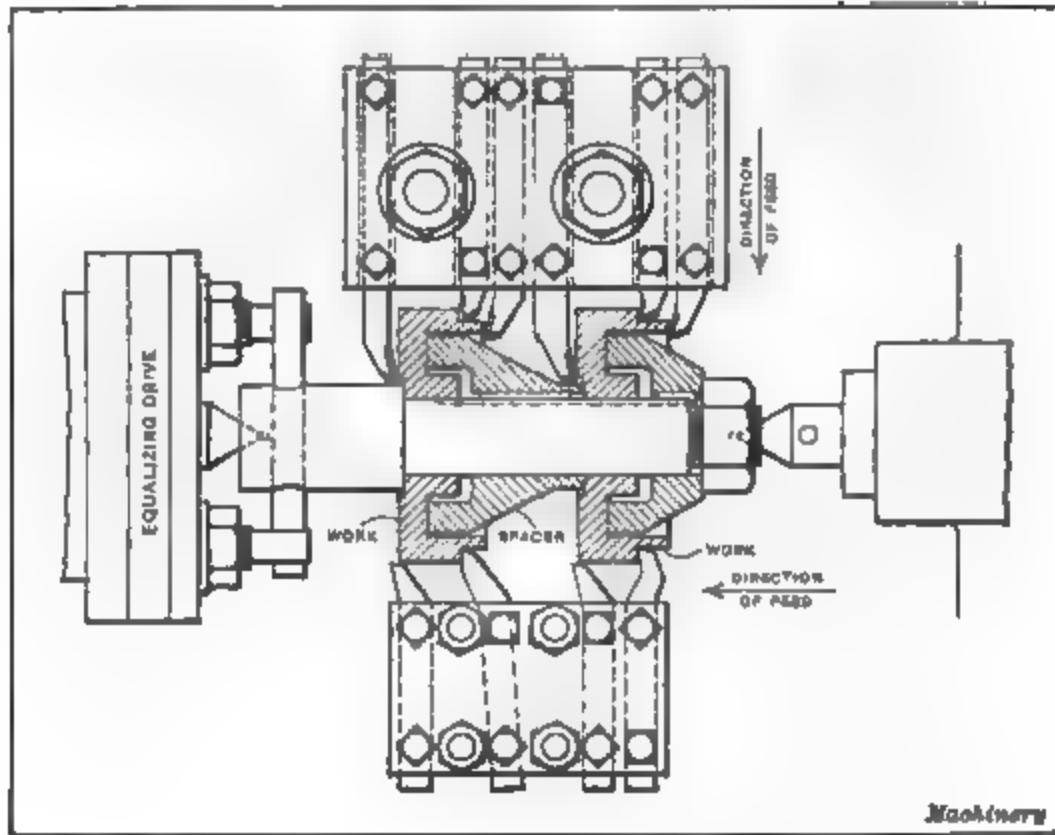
Example of Two Pieces clamped on Arbor, illustrating Use of Spacer
